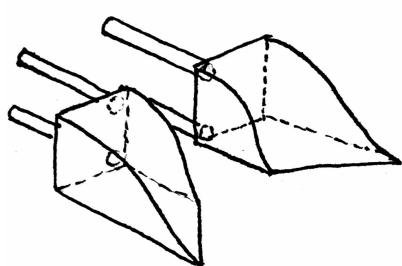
The double wedge design used to wedge open the lids of the pillbox
